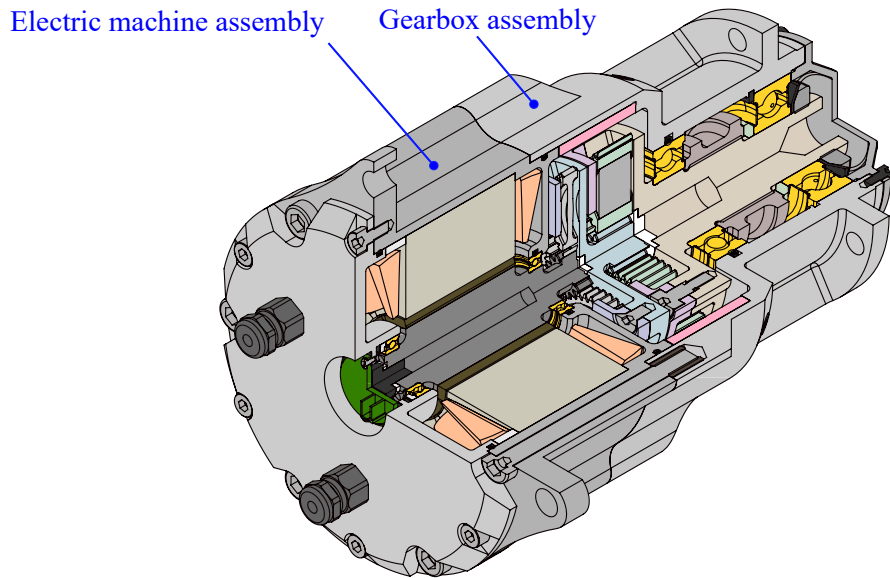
Isometric cut view of the rotary electromechanical shock absorber prototype designed for the retained motorcycle.
